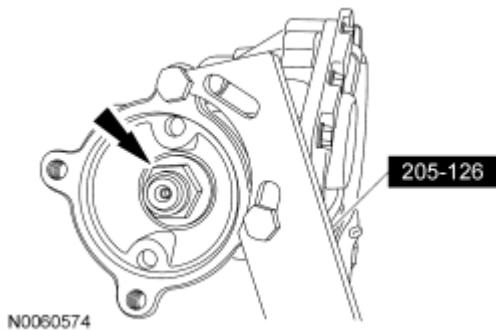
Holding Output Pinion Flange Using Special Tool (205-126)
